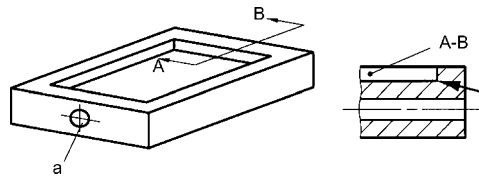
Hot runner manifold block with area recessed to hold a thermal insulation plate lying perfectly flat (diagram), notch ←
